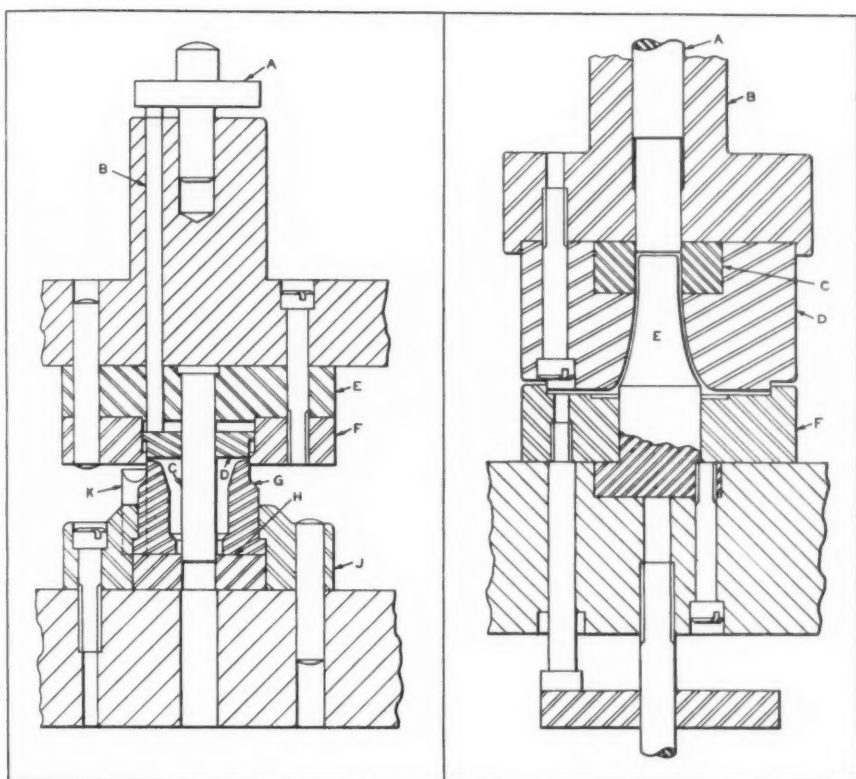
(Left) Die for Trimming Flange of Shell and Piercing 3/8-inch Hole in the End
